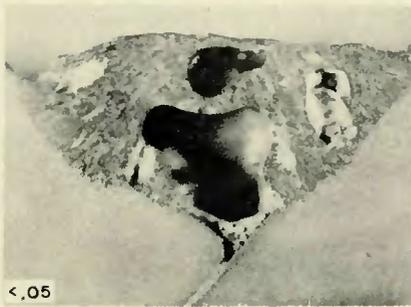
Cross-section of weld made in static air (< .05% Al in weld)
